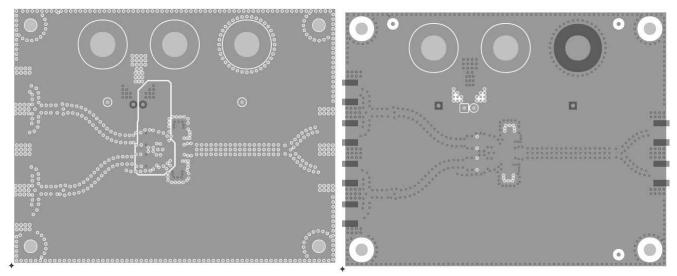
DS90LVRA2 EVM PCB Layout – Layer 3 Figure 2-6. DS90LVRA2 EVM PCB Layout – Layer 4 (Power Plane)
